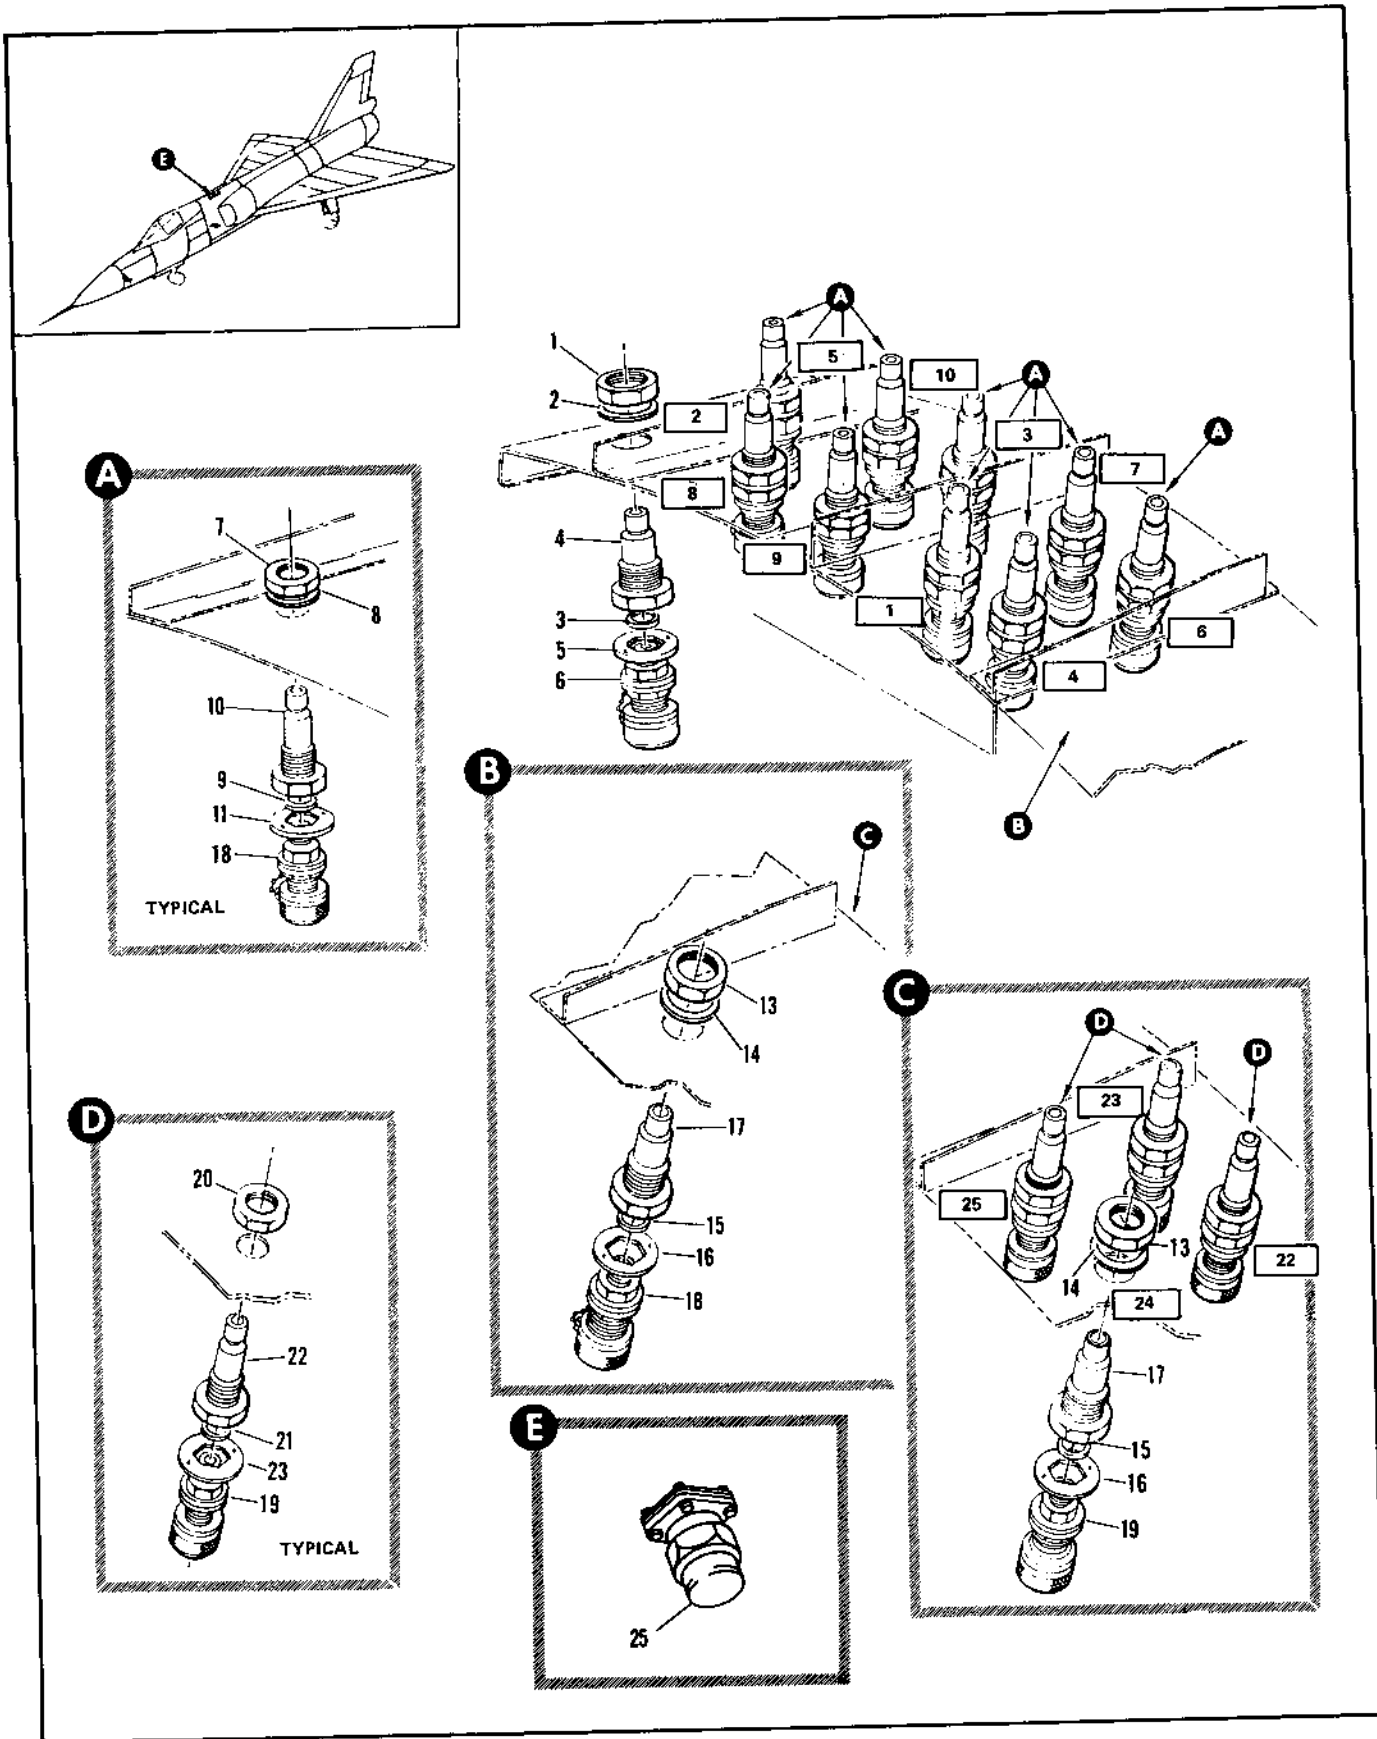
Fuel System Checkout Adapter Installation Forward
